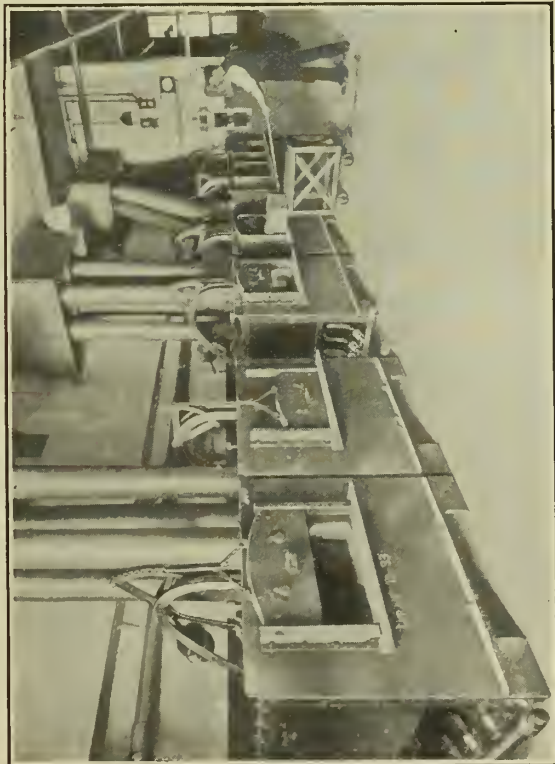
CASE-HARDENING COMPONENT PARTS OF RIFLES IN REVERBERATORY OVEN FURNACE.
